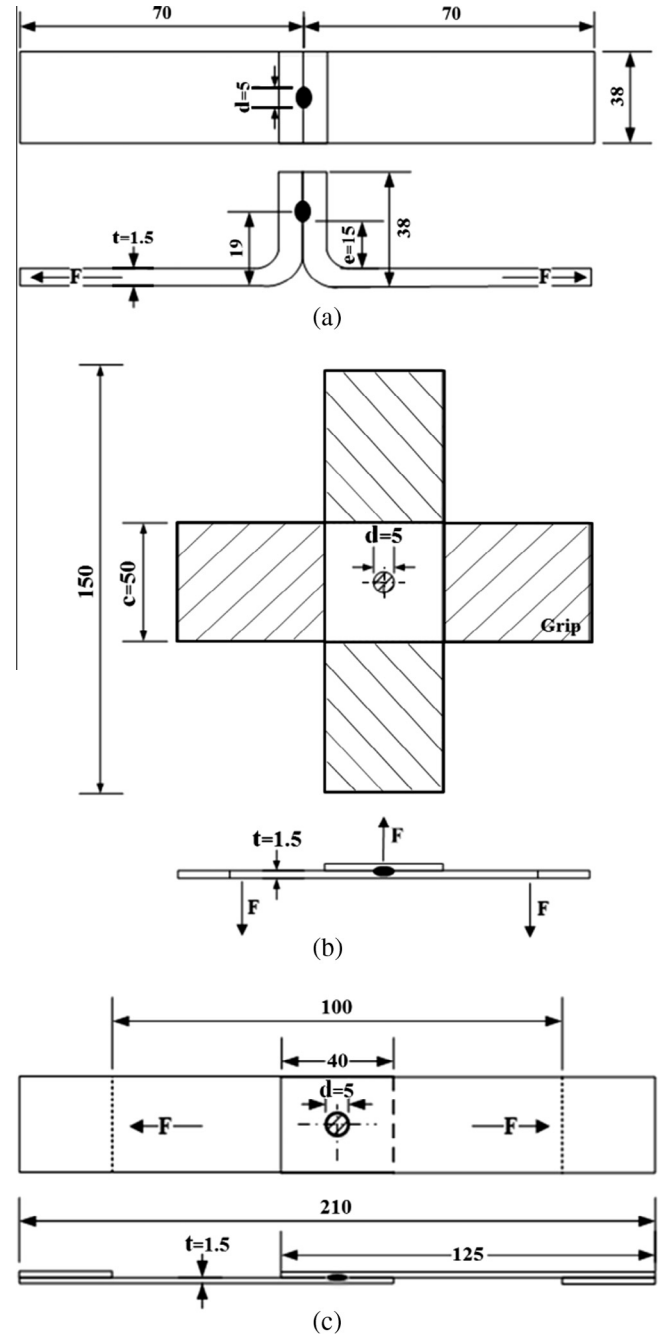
Geometries of three types of SPR specimens: (a) coach-peel, (b) cross-tension and (c) tensile-shear.
